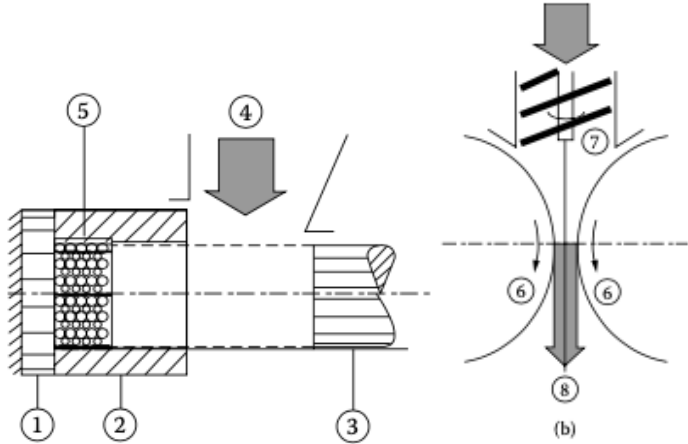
Typical briquetting methods: punch-and-die machine (left) and roller press (right) [10].
